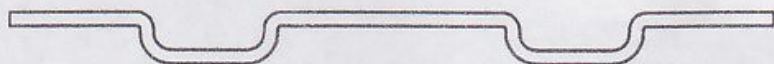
THE DOOR REINFORCEMENT CROSS-SECTION LAYOUT
